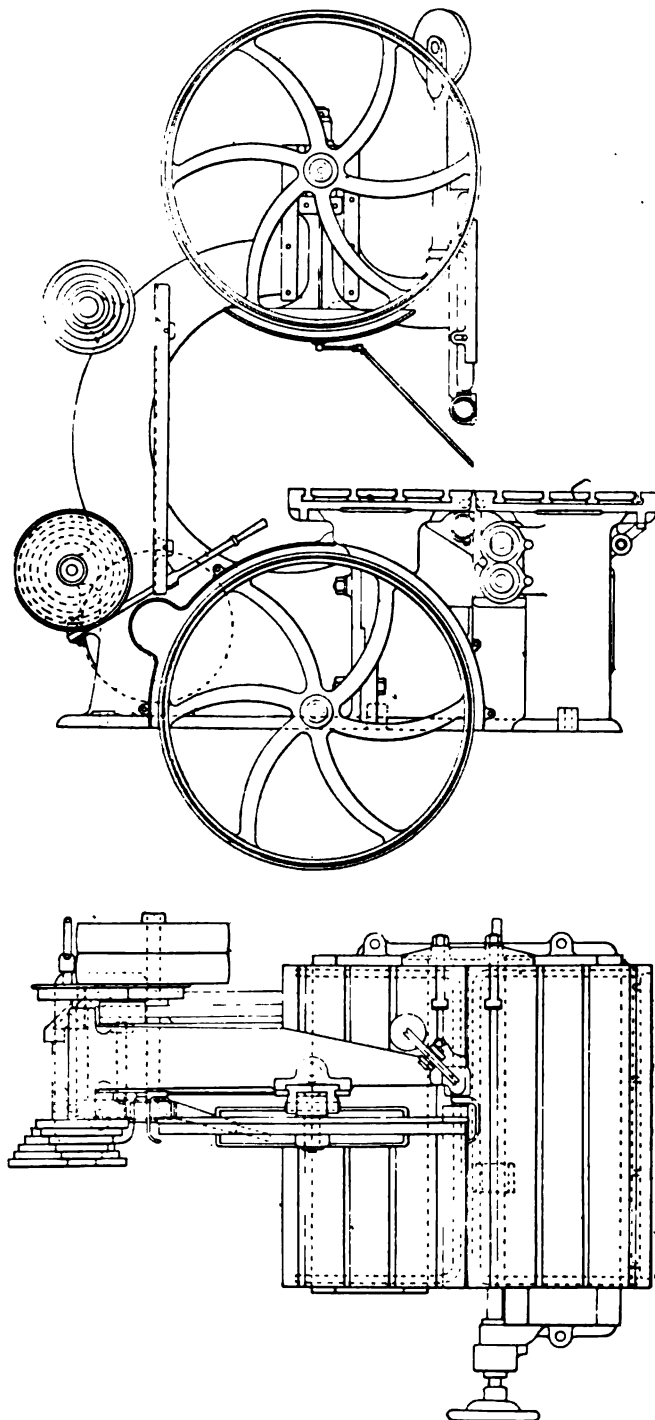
Band Sawing Machine for Metal. (B. & S. Massey.)
